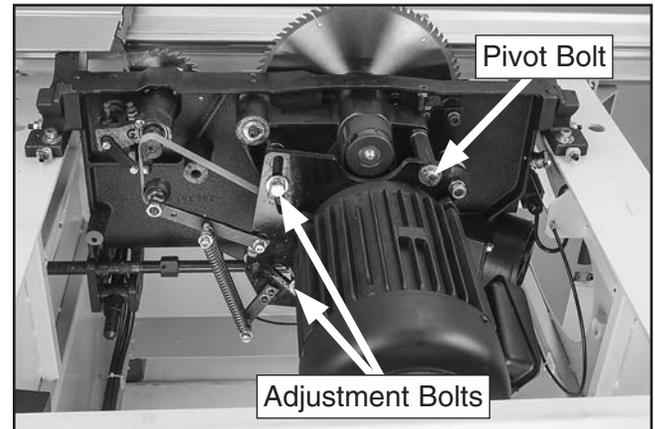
Locations of adjustment and pivot bolts (cast-iron table removed).
